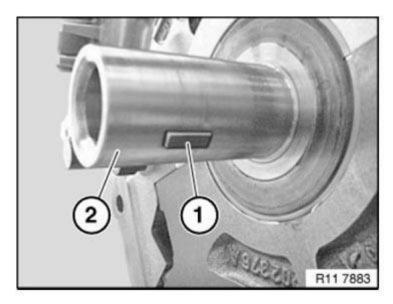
Identifying Woodruff Key And Crankshaft Courtesy of BMW OF NORTH AMERICA, INC.
